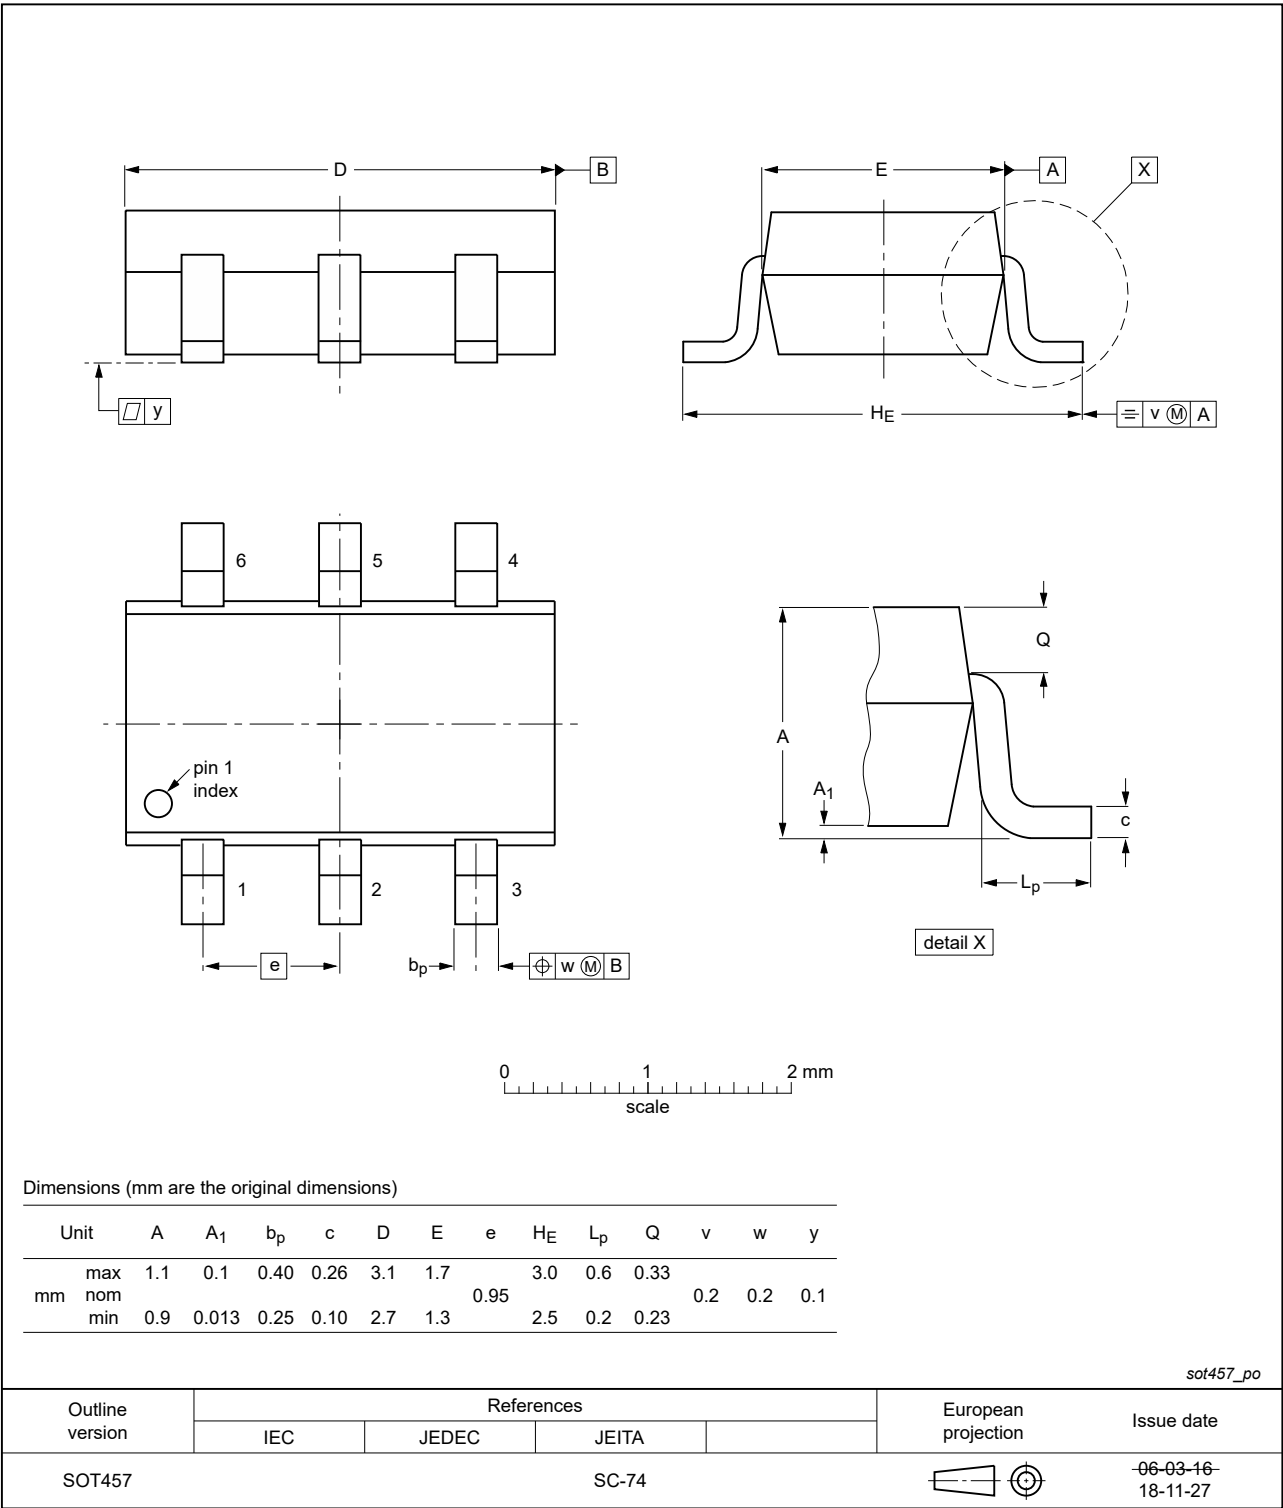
Package outline SOT457 (SC-74; TSOP6)
